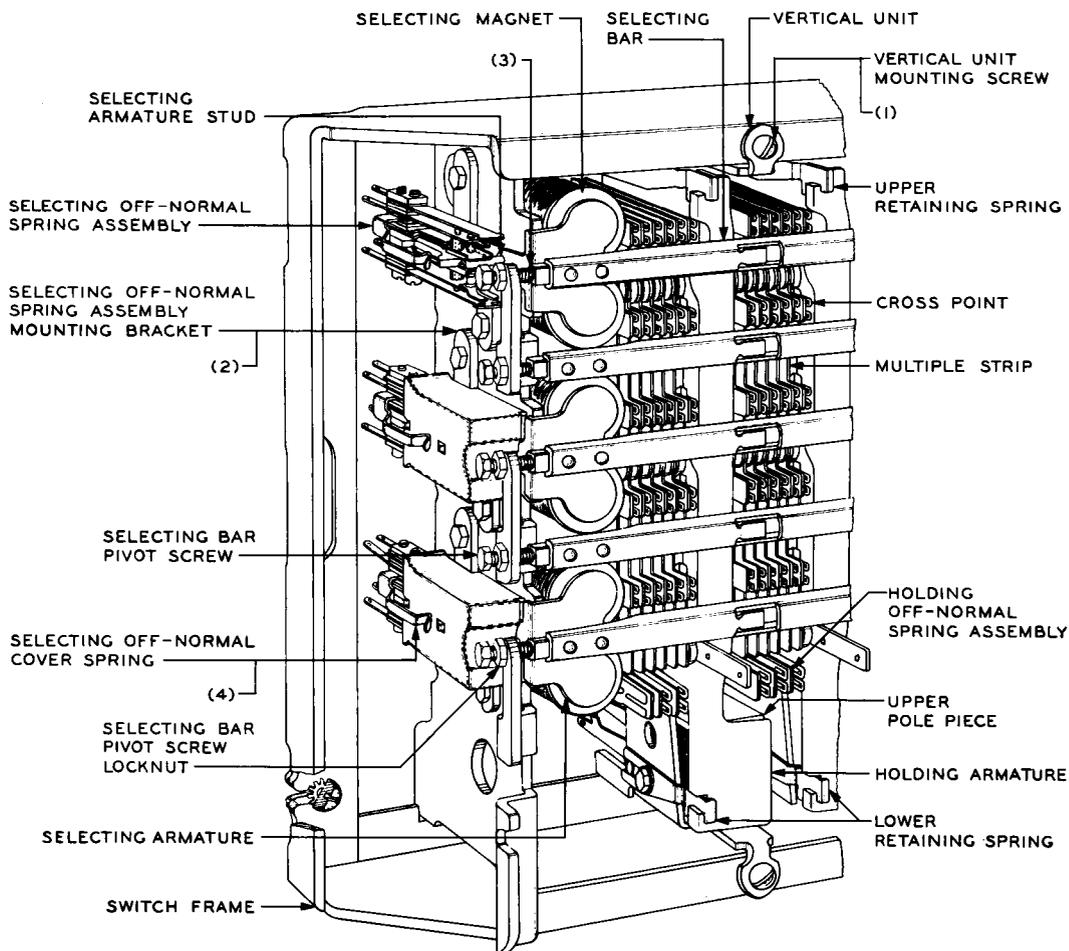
Fig. A – General View of Switch Equipped With Vertical Units Having Upper and Lower Retaining Springs
